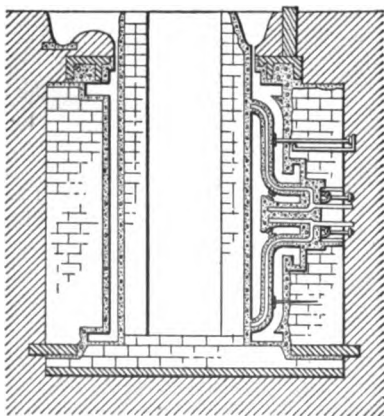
SECTION OF MOLD ARRANGED FOR CASTING A STEAM ENGINE CYLINDER.
